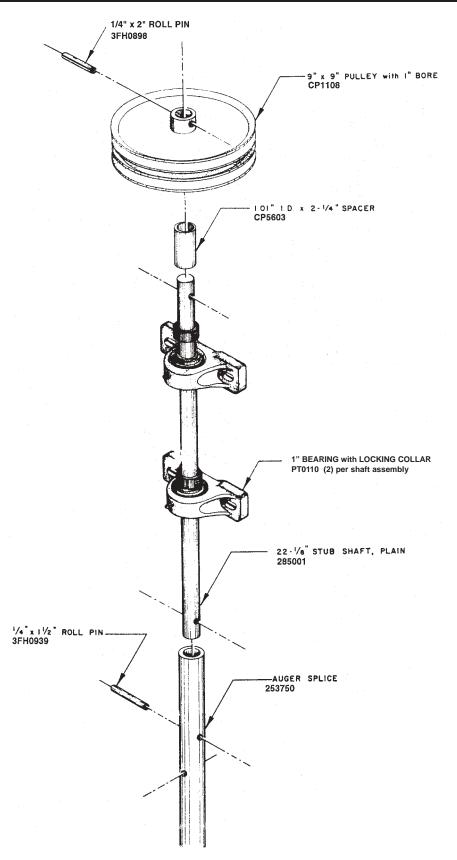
Stub Auger Assembly No. 1 (280001)
